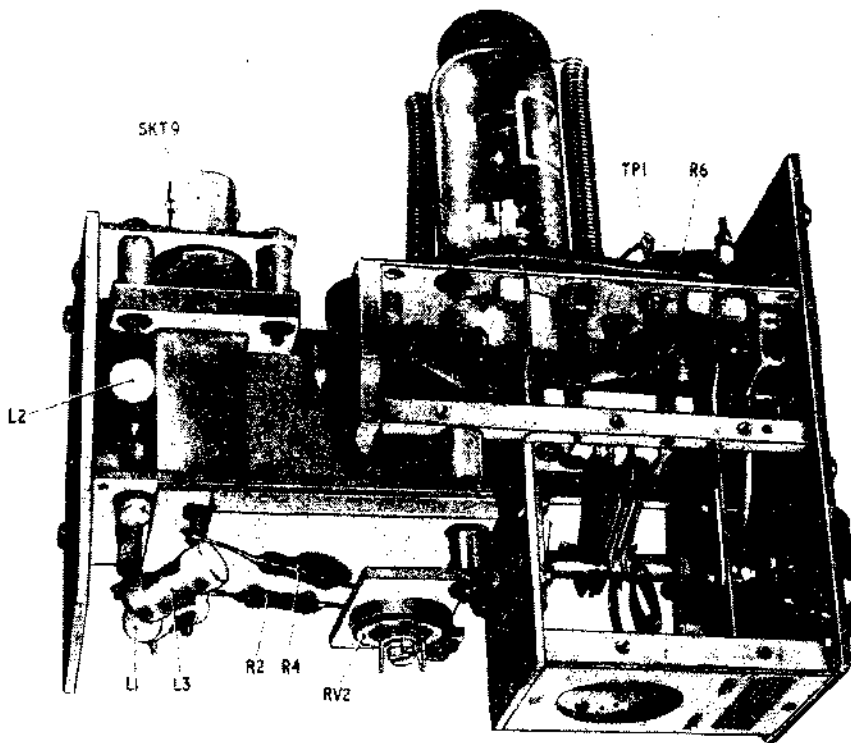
Amplifying unit (RF) Type 11681 — rear
